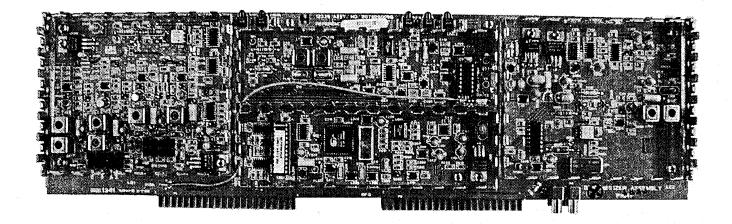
P/N 8076060095 Revision B Synthesizer Printed Circuit Assembly
